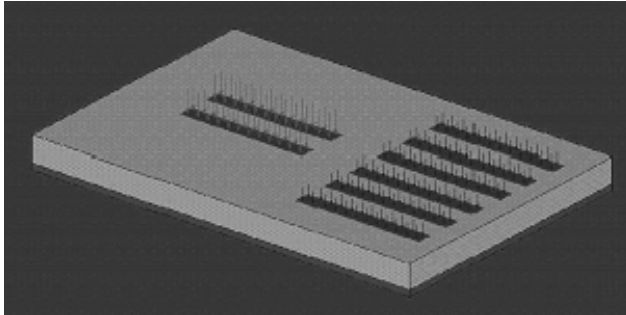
MHVIC910HNR2 Device on the Test Board
